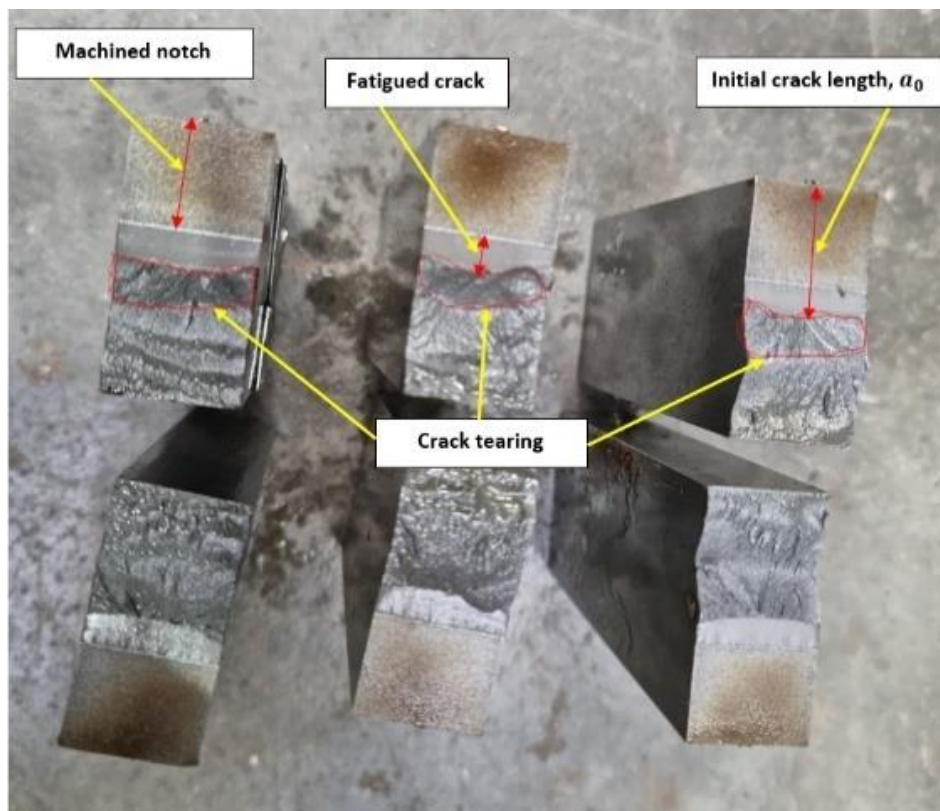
Oxidised crack faces for easy identification of the start and end of crack tearing for SENB specimen with crack depth $a/W=0.5$ tested at room temperature
